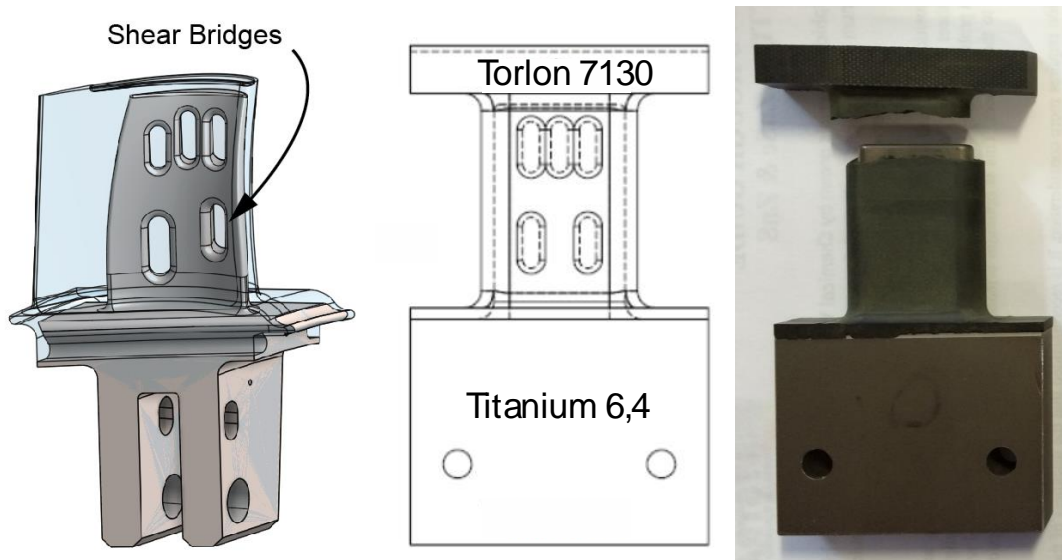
UCAM plastic (Torlon) rotor blade design and mould testing specimen
